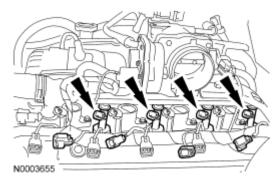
Ignition Coil Electrical Connectors Courtesy of FORD MOTOR CO.
